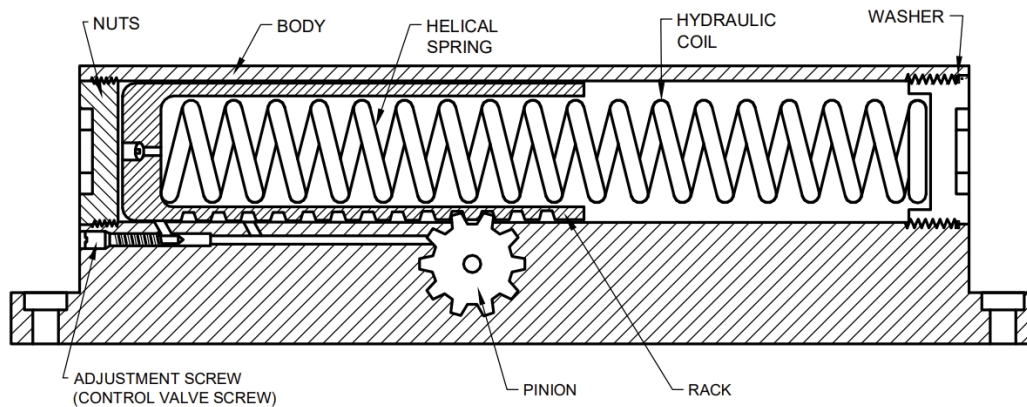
A TYPICAL SKETCH OF MECHANISM OF RACK & PINION TUBULAR TYPE HYDRAULIC DOOR CLOSER
